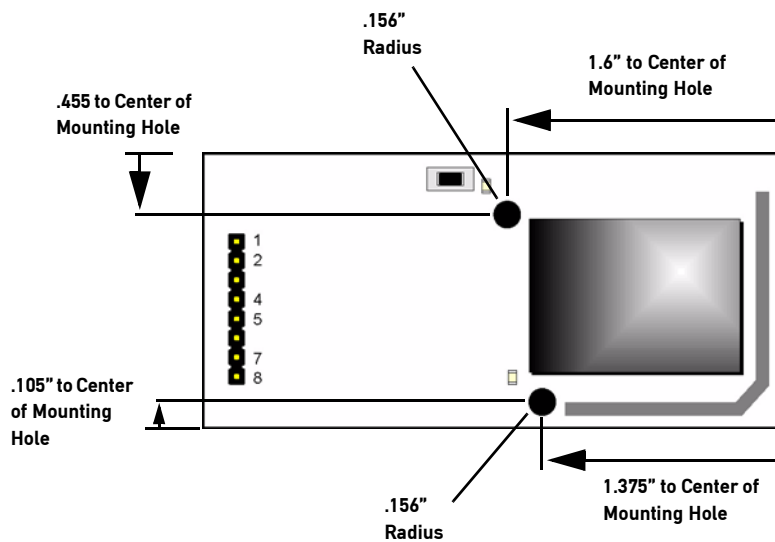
EN3942 Two-Way Serial Data RF Module Mounting Hole Dimensions
